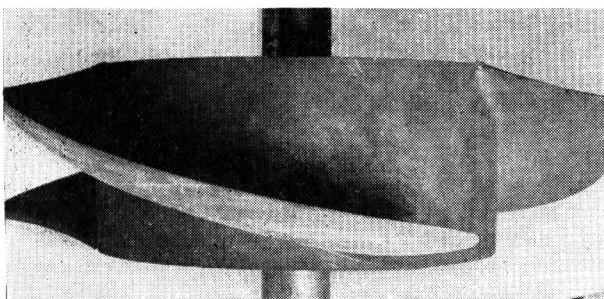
AXIAL-FLOW UNIT OR PROPELLER PUMP
